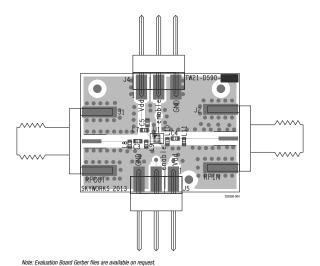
SKY65611-11 Evaluation Board Assembly Diagram
